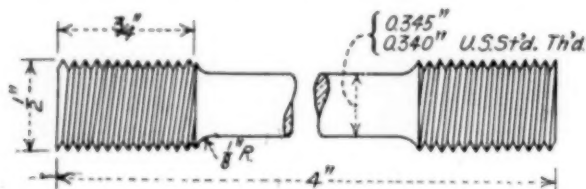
DETAIL DRAWING OF SPECIMEN USED IN THE TESTS
